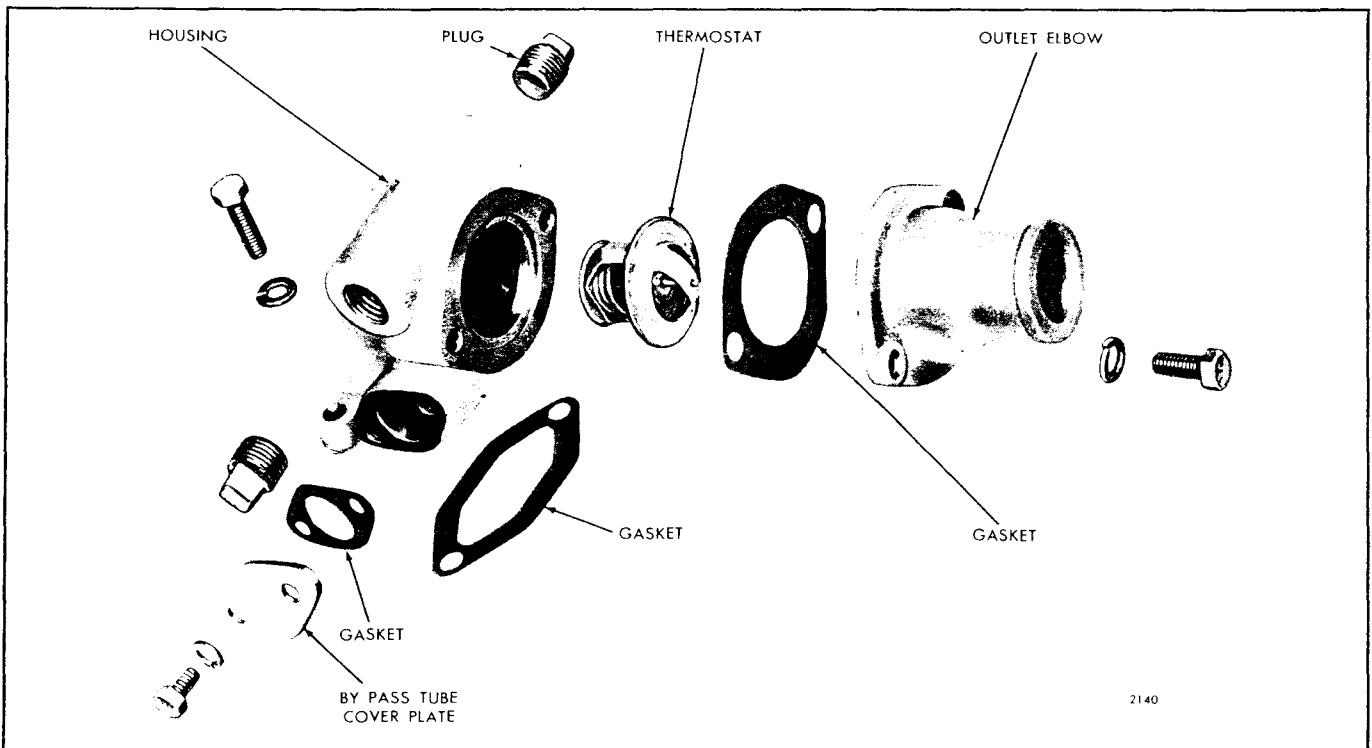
Thermostat Housing Details and Relative Location of Parts (In-Line Engine)
